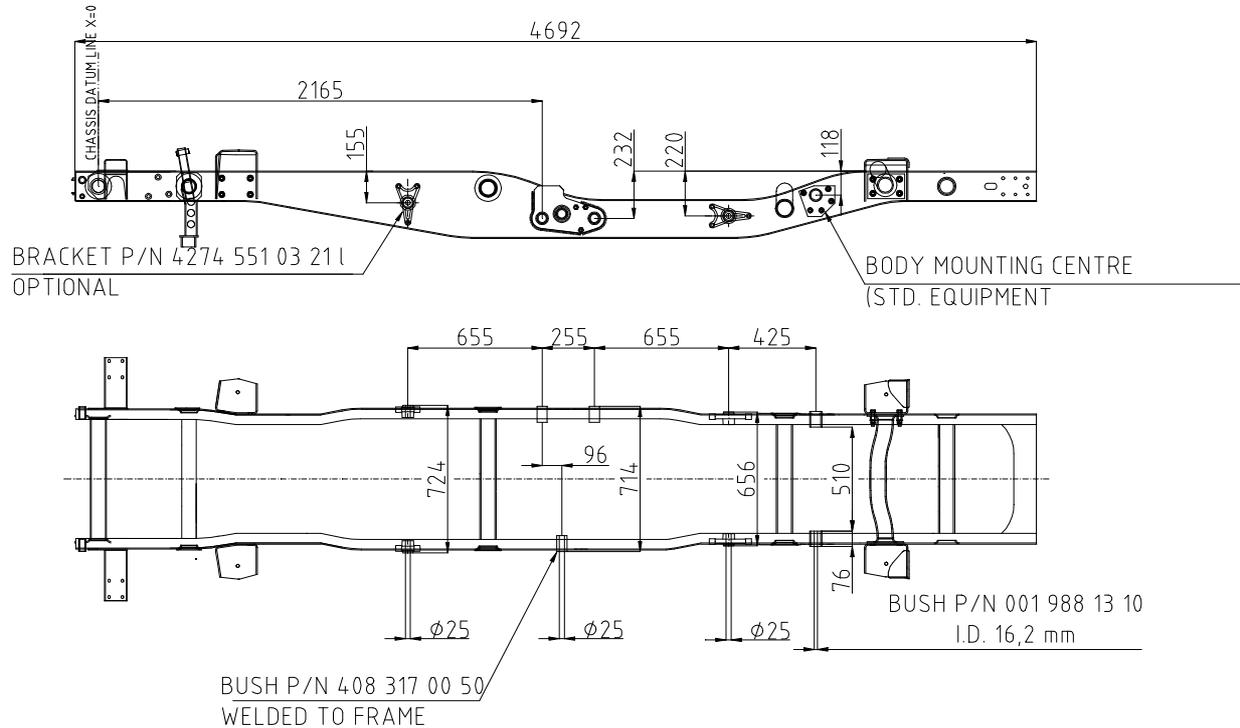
Center implement points, frame U100L Turbo, BM 408.216 (code D61, 3 bushings welded in and 2 mounting supports 427 551 03 21)
